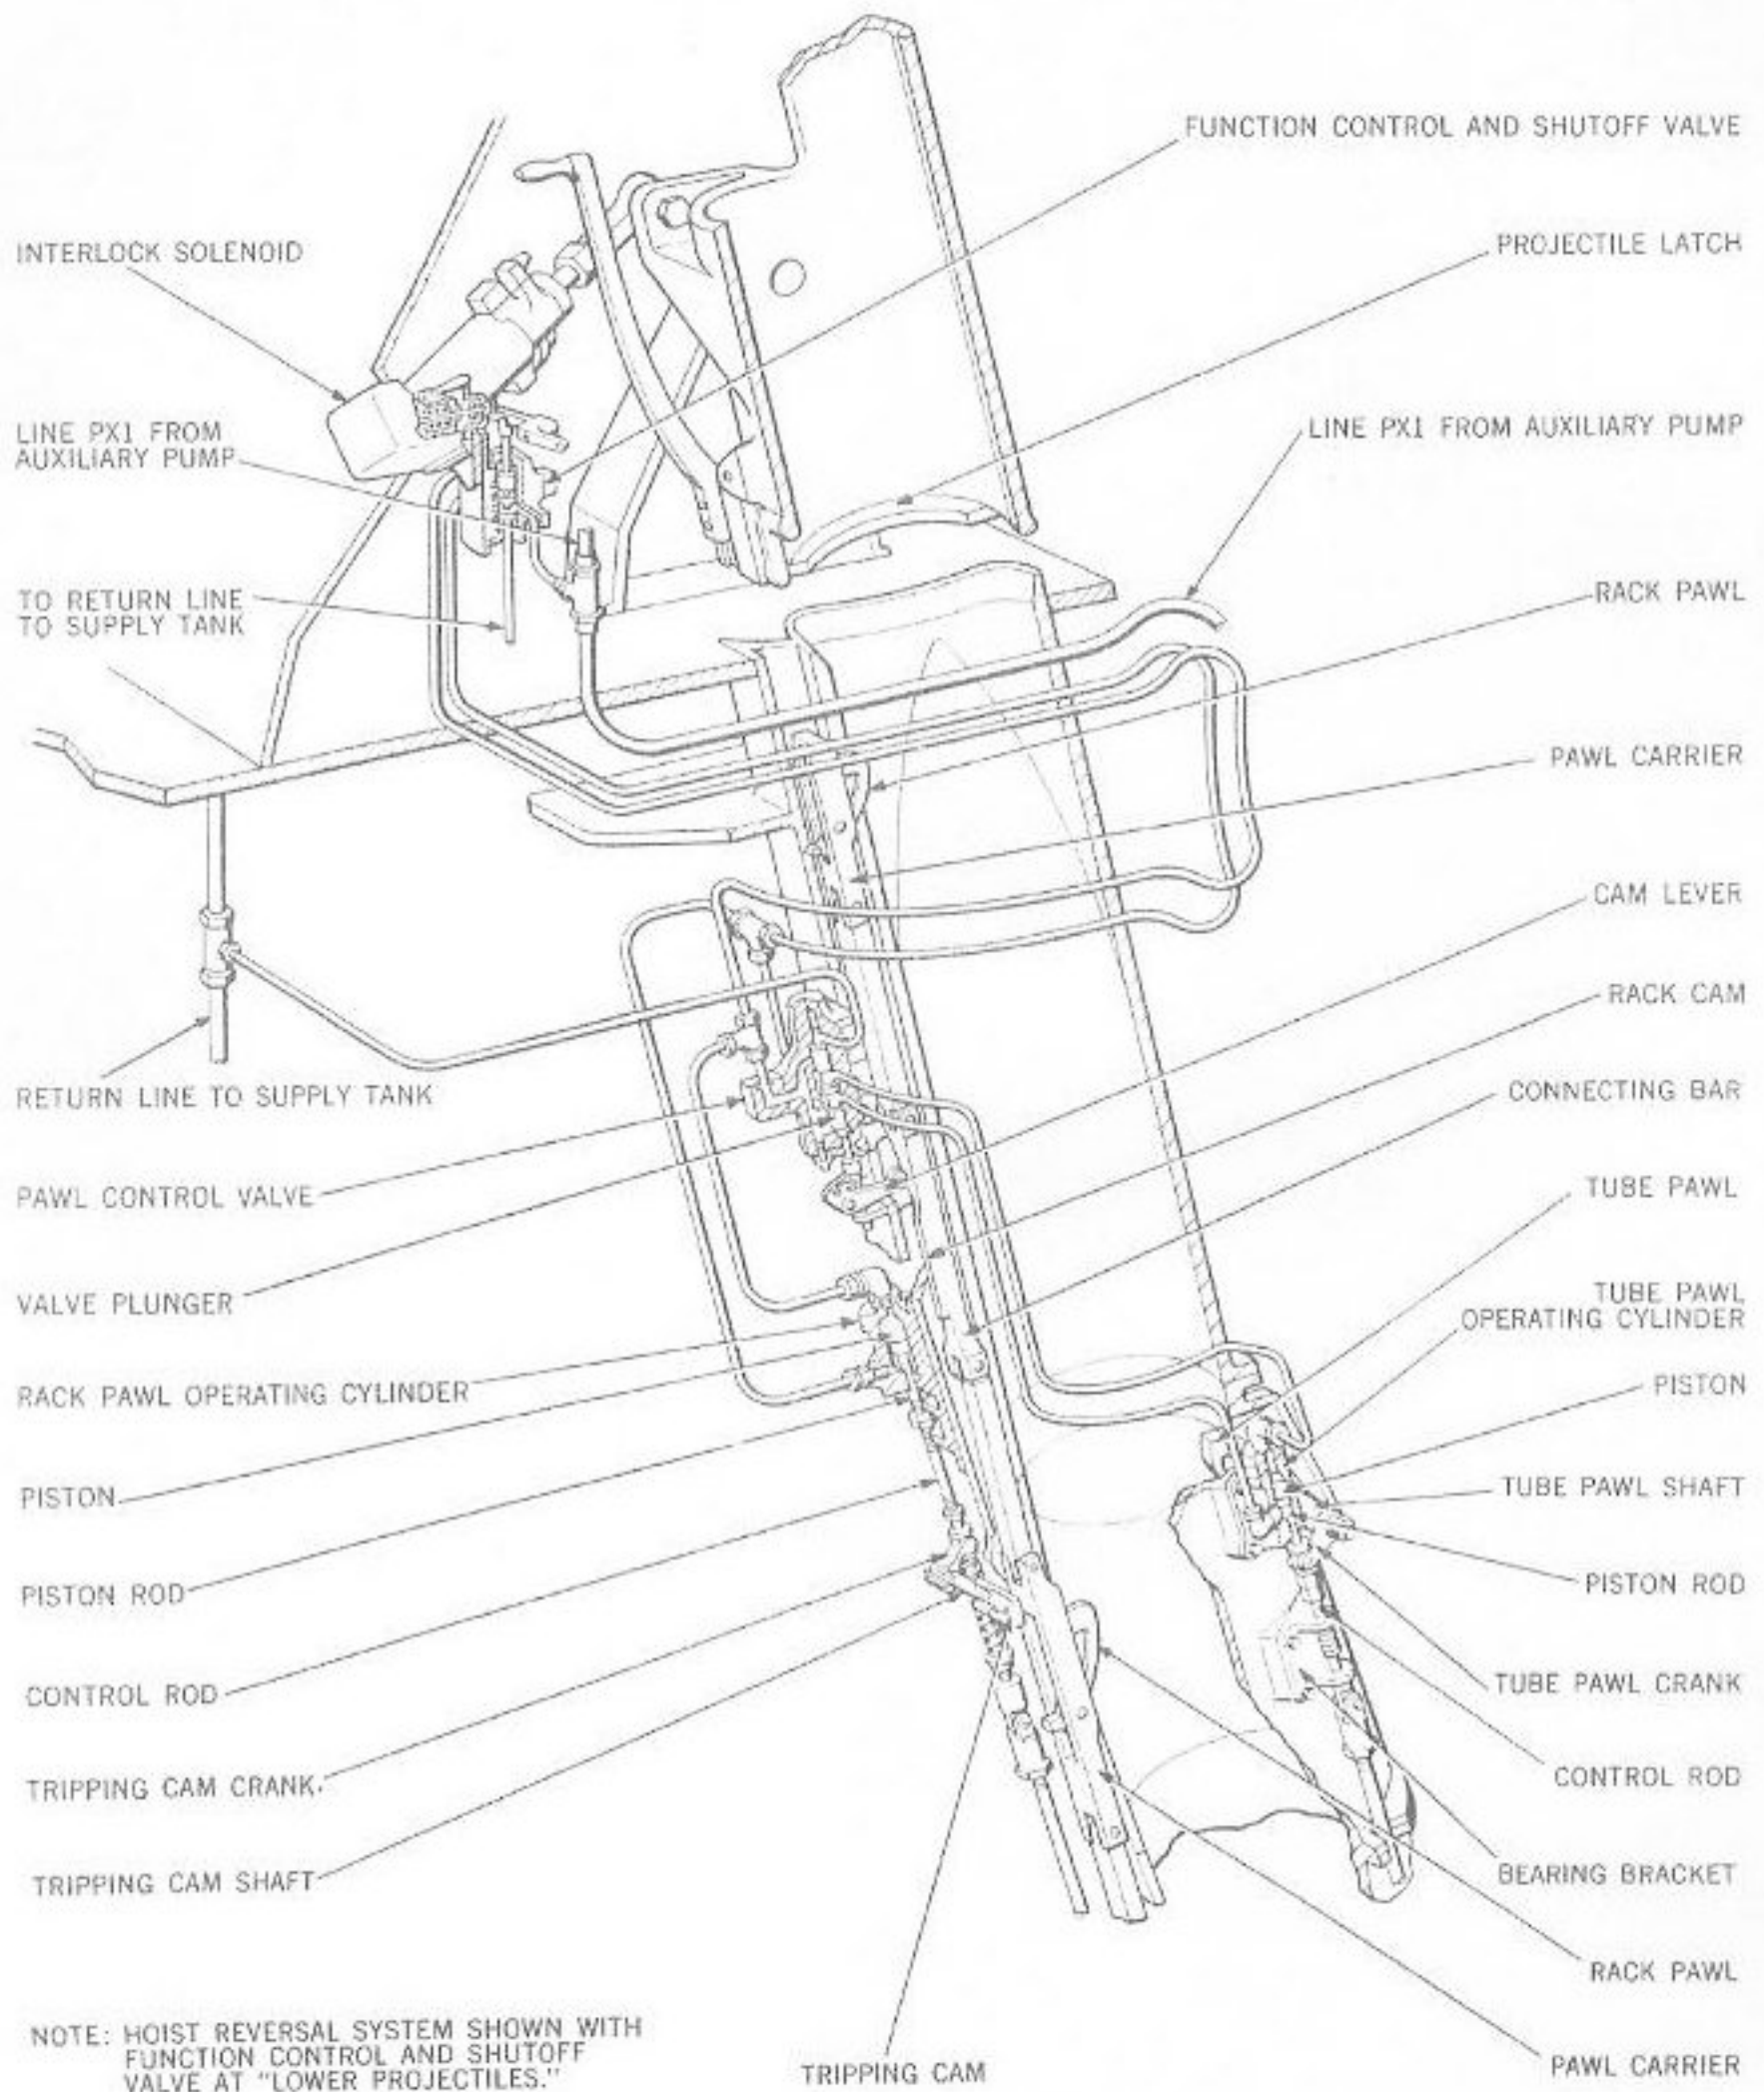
Tube Pawl and Rack Pawl Reversing Control Arrangement - Sectional View
